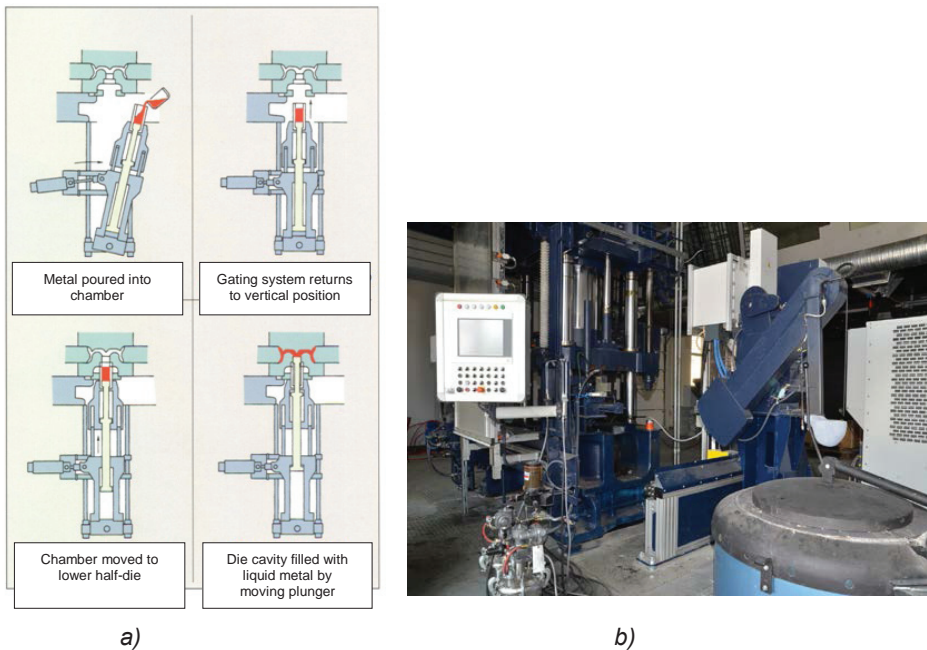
The UBE VSC 500 machine: a) schematic diagram of the gating system, b) test stand
